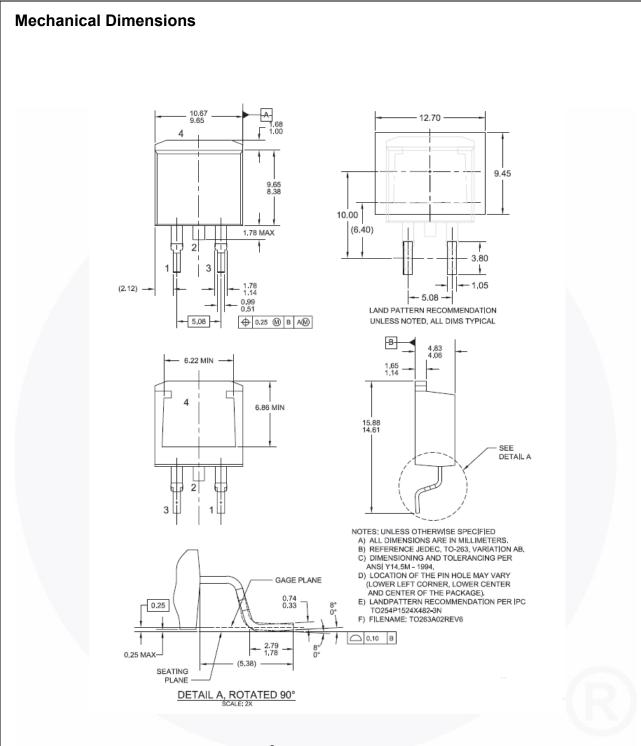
TO263 (D²PAK), Molded, 2-Lead, Surface Mount
